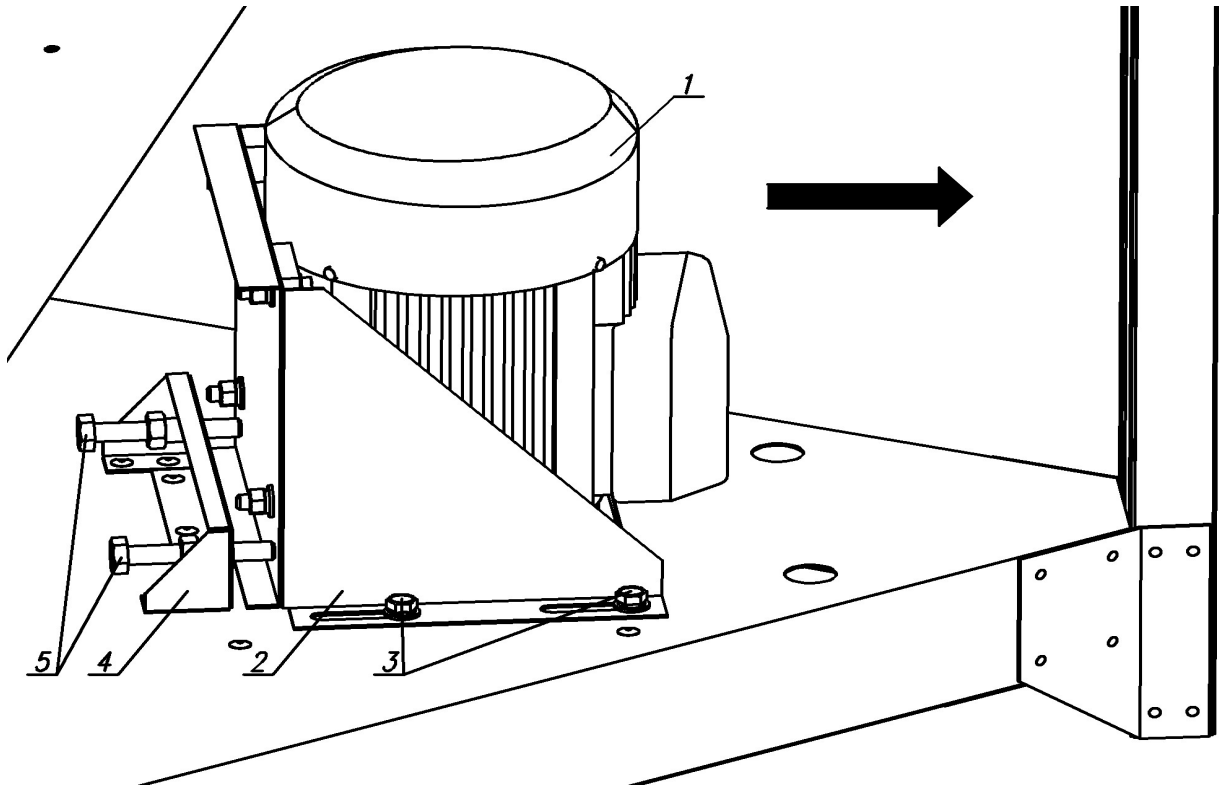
A method for adjusting the belt drive: 1- motor, 2- motor base, 3 – motor base screws, 4 – tensioner, 5 – tensioner M10 screws.
